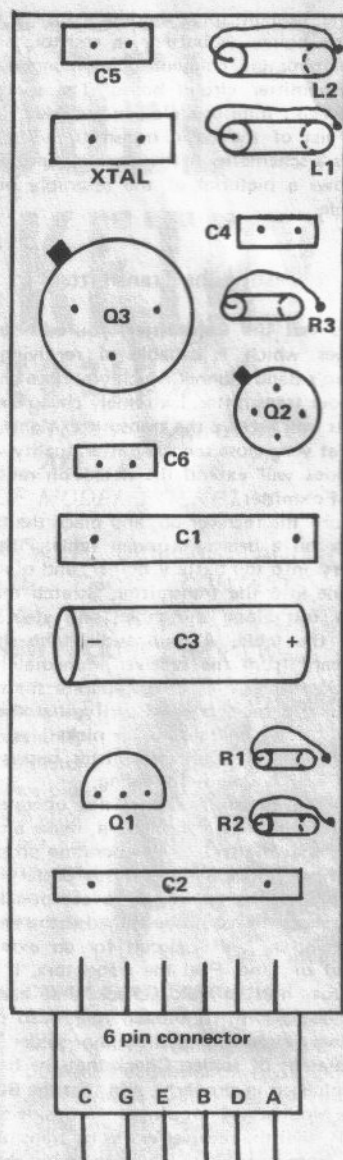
FOXMITTER-3 PARTS LAYOUT. Top view of the printed circuit board shows location of all components. All resistors and inductors are mounted standing on their ends.
